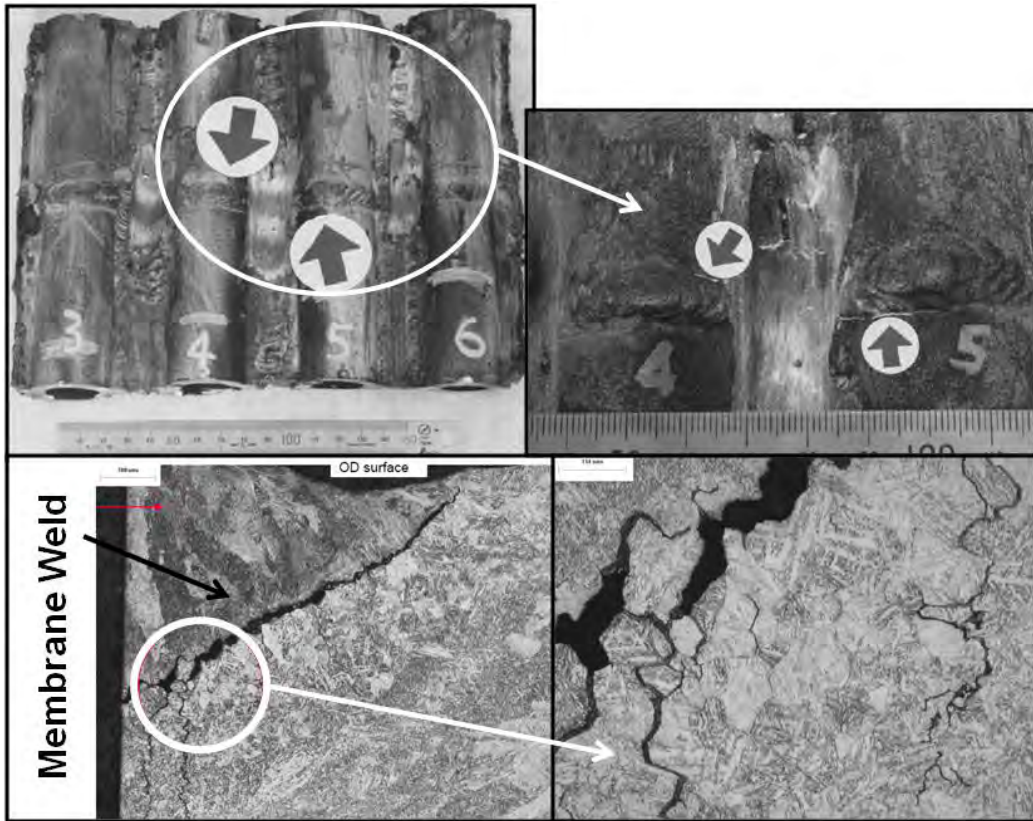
Example of Stress Corrosion Cracking (SCC) in a Grade 23 Tube to Tube Butt Weld
